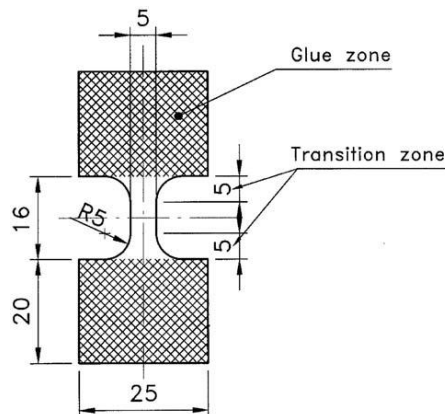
Tensile sheet specimen design used by Verleysen and Degrieck [36].
